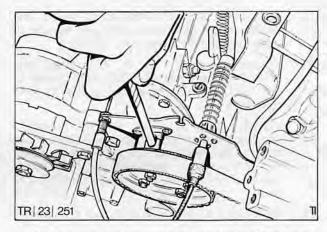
Injector pump set at spill timing using an 8 mm twist drill to line-up hole
